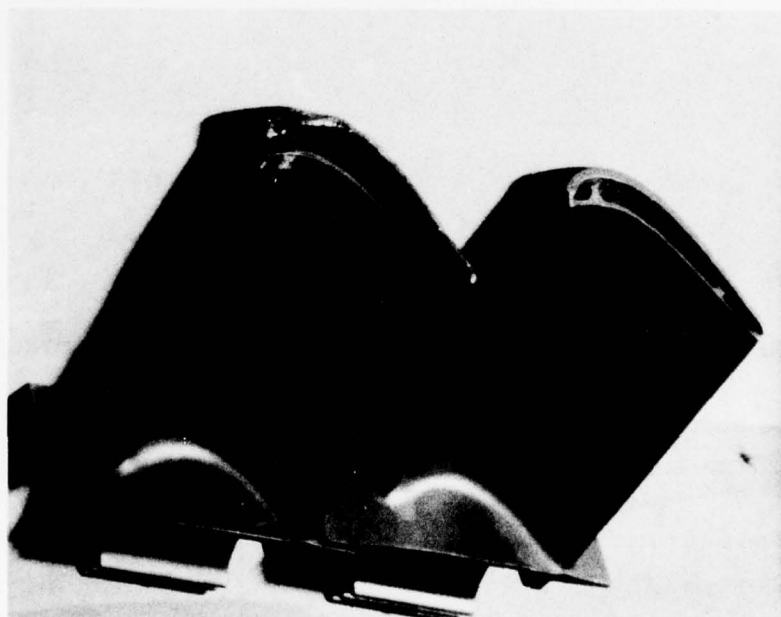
TURBINE BLADE TIP WELD REPAIR. LEFT - WELDED TIP; RIGHT - BLENDED TO ORIGINAL CONTOUR.
